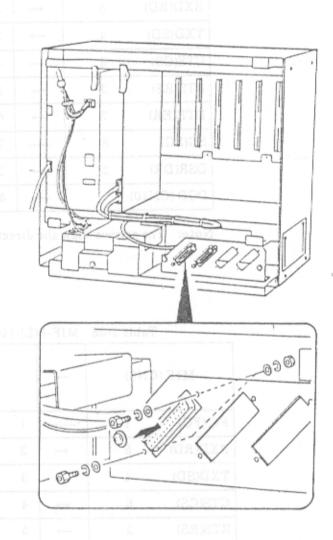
Connecting the MIF Cable Assembly and the MIF-F(L)-10 KTU to the Basic KSU
